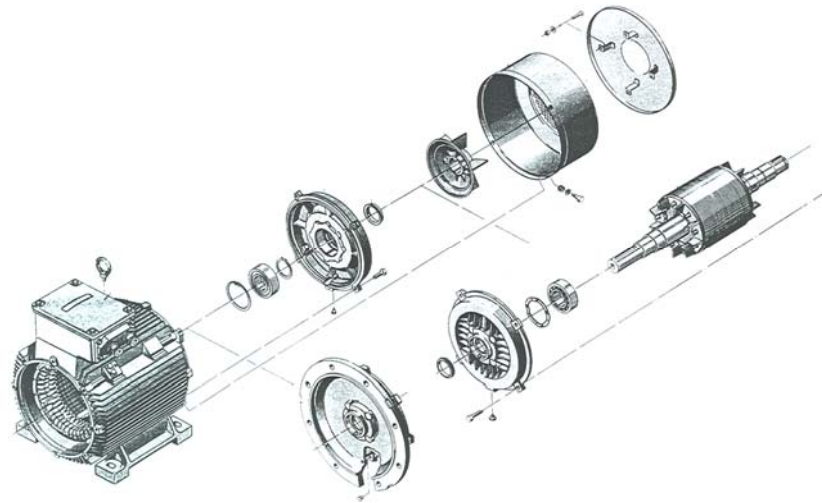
Standard induction motor: Motor elements for foot and flange type totally enclosed fan cooled squirrel cage machine (Siemens AG)
